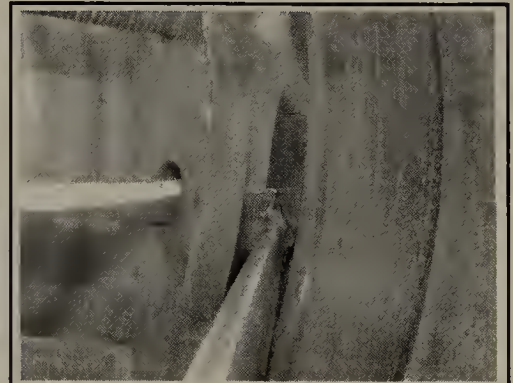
Use a screwdriver to depress the hold-down spring, then slide the pin until it can be removed
